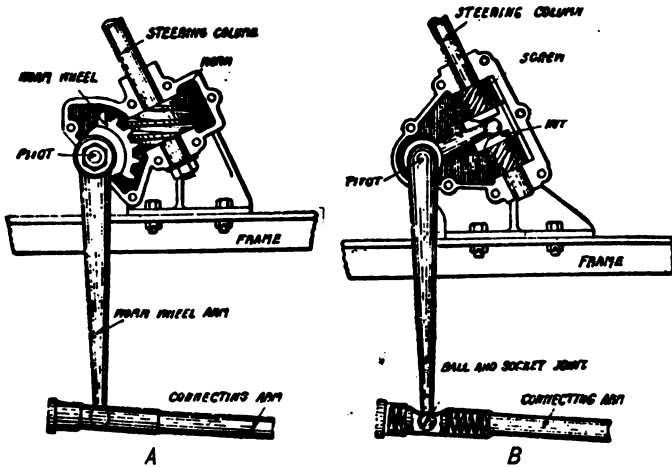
STEERING MECHANISMS. A, Worm and worm-wheel steering gear ; B, nut and screw steering gear.
